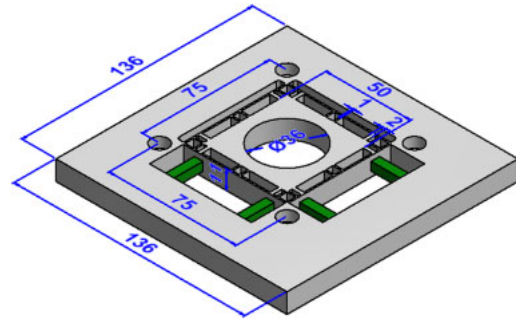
(Color online) Dimensional details of the proposed high-speed scanner. All dimensions are in mm.
